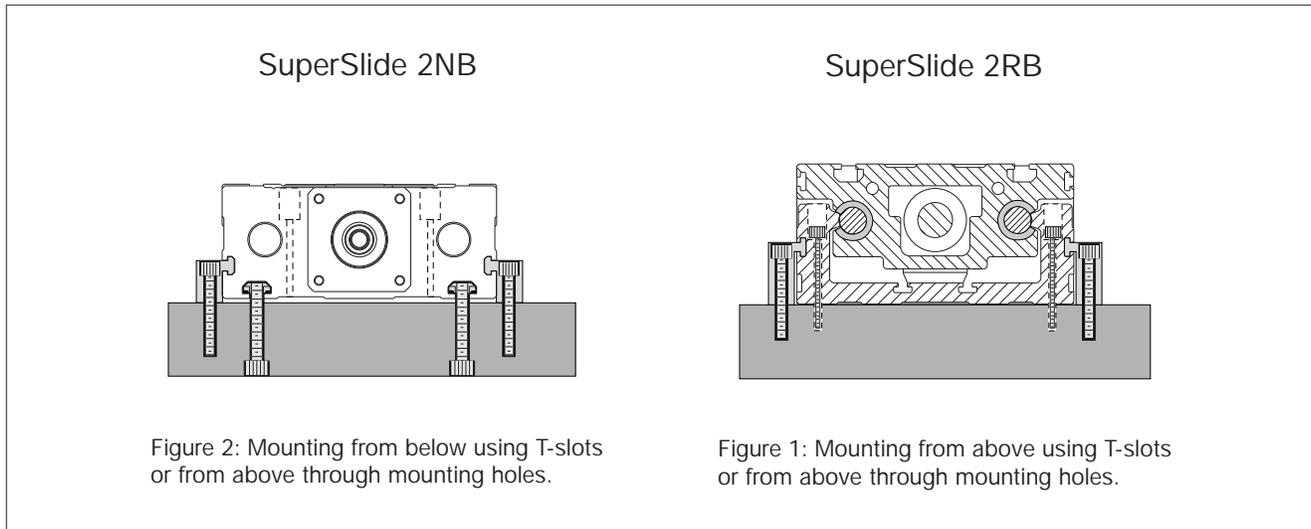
Mounting from below using T-slots or from above through mounting holes.
